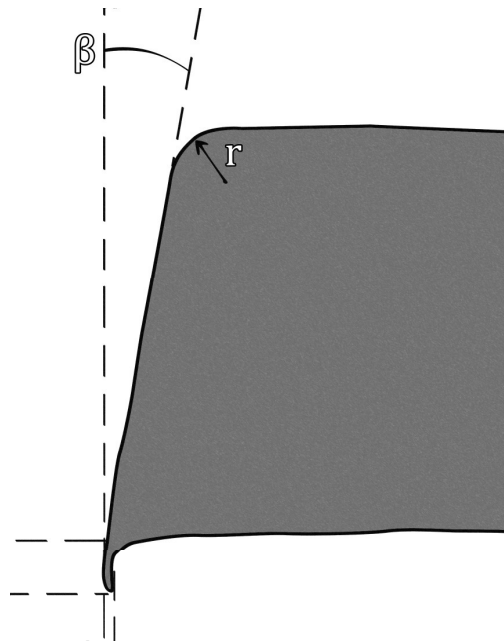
Defects in the kerf of abrasive waterjet cutting, transversal section showing taper (β), edge rounding (r) and burr of certain length and root thickness
